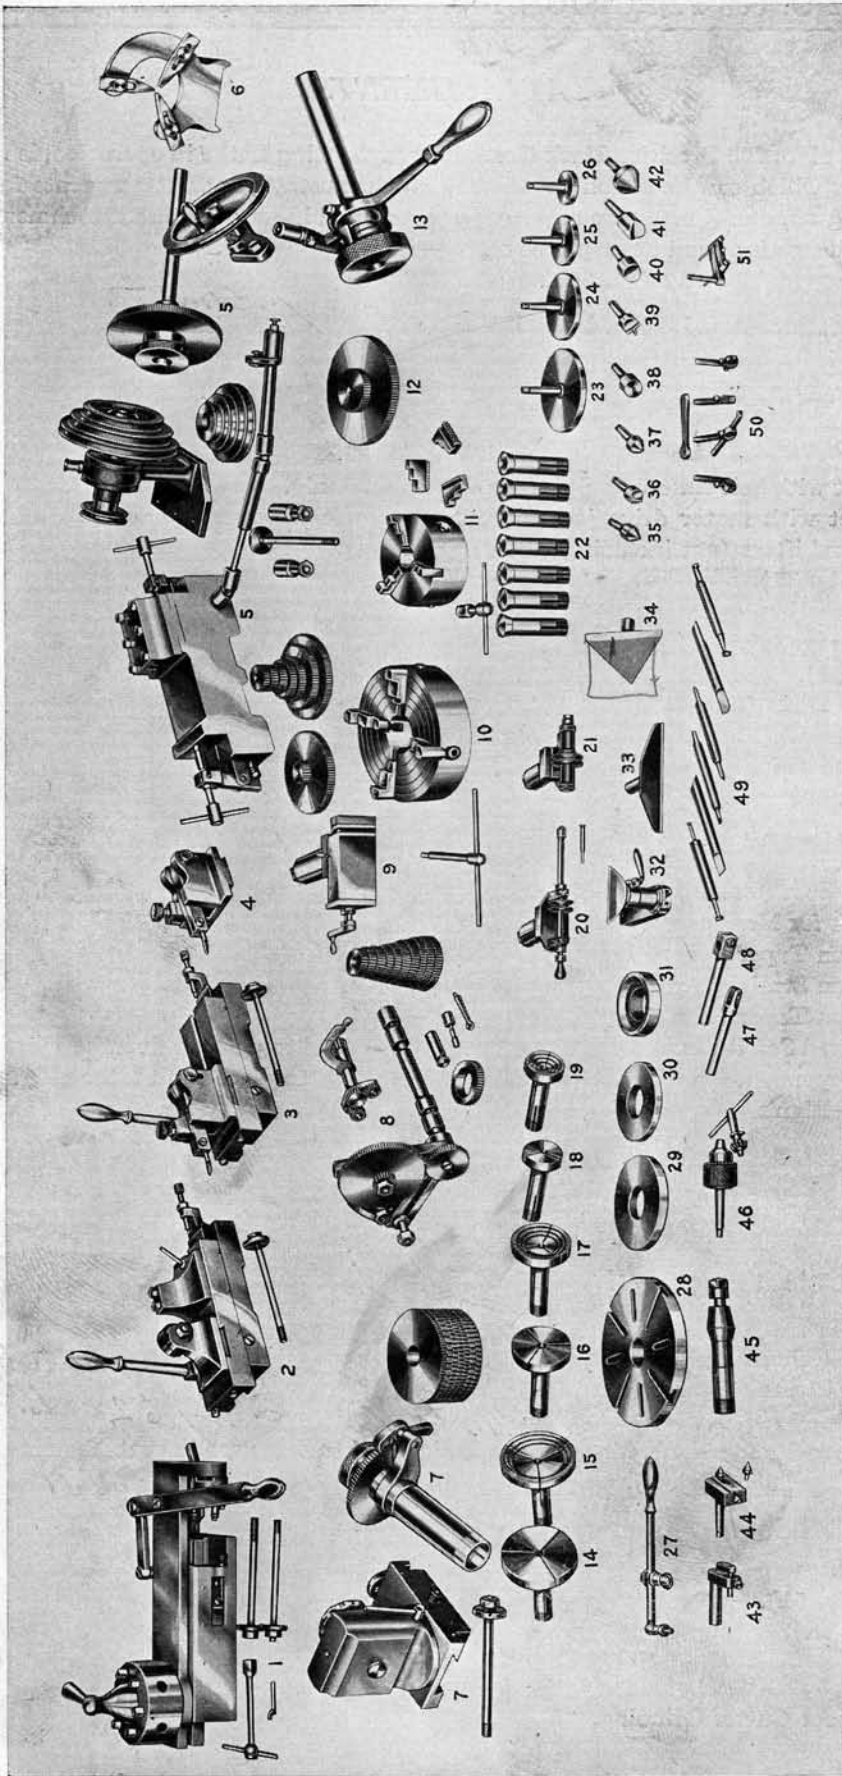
a. Rivett Precision Attachments for Lathe No. 608
